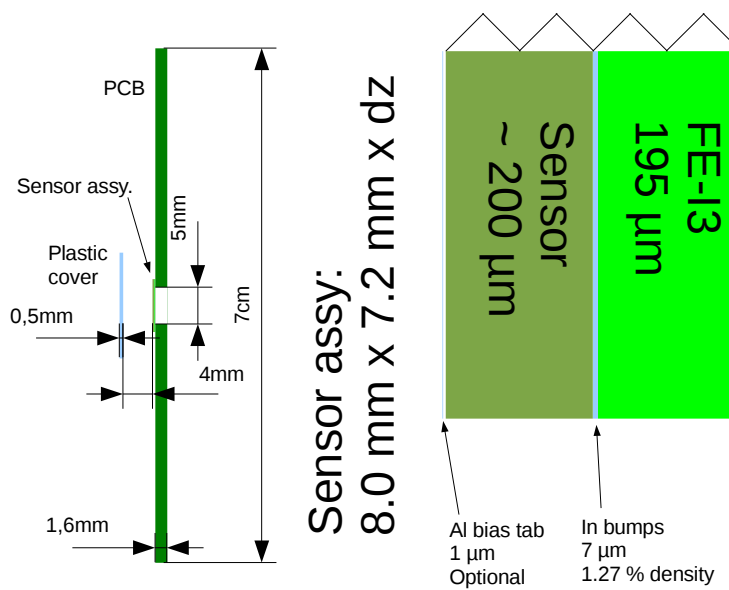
Pixel module assembly. Left panel: Overall geometry, including PCB and plastic cover. Right panel: Thickness of parts in sensor assembly.
